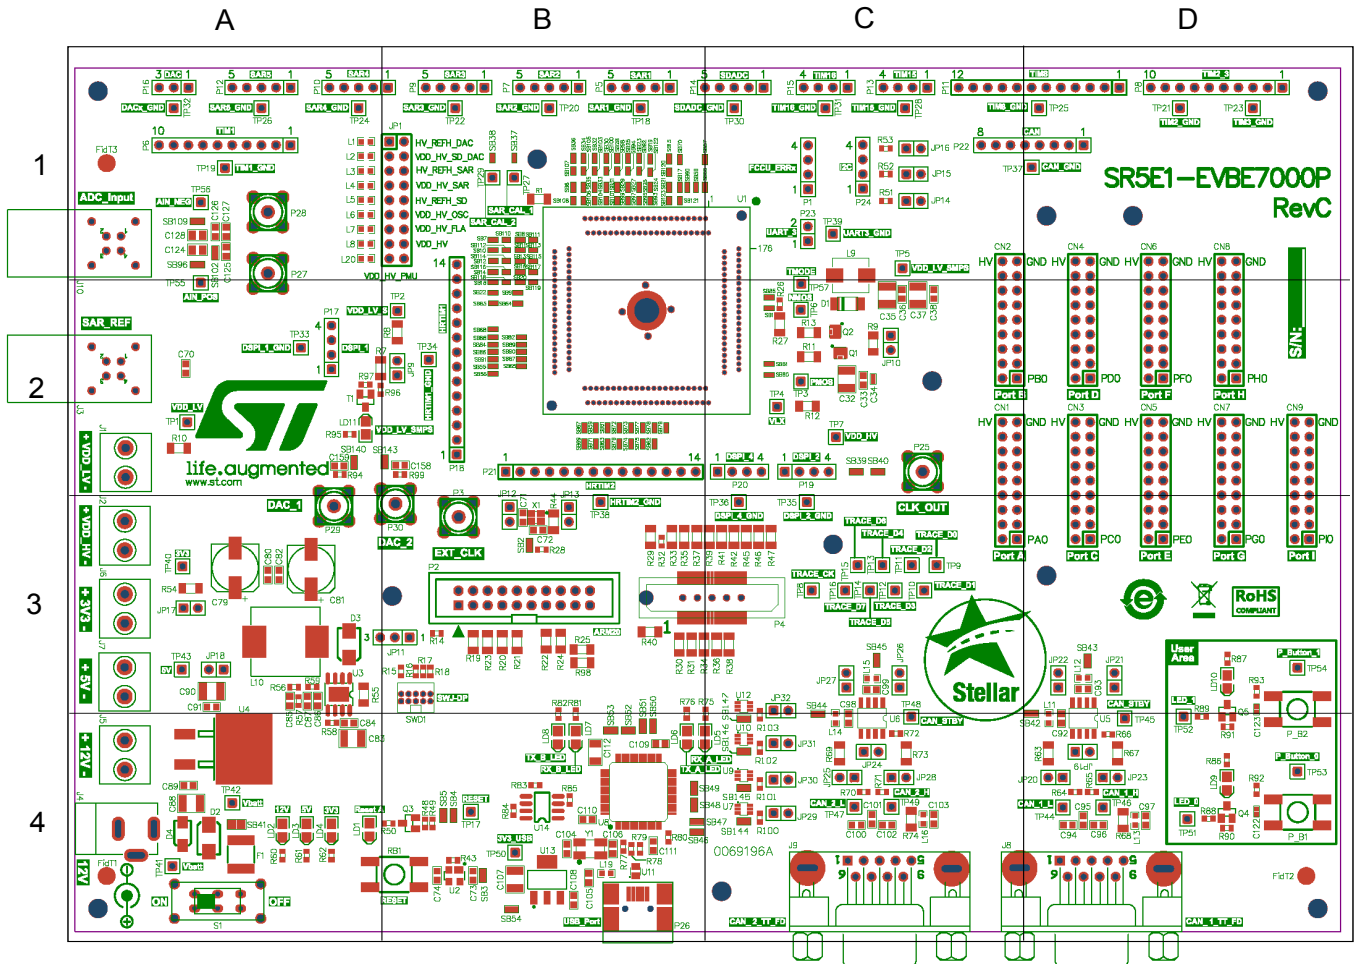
SR5E1-EVBE7000P rev. C - bottom layer
